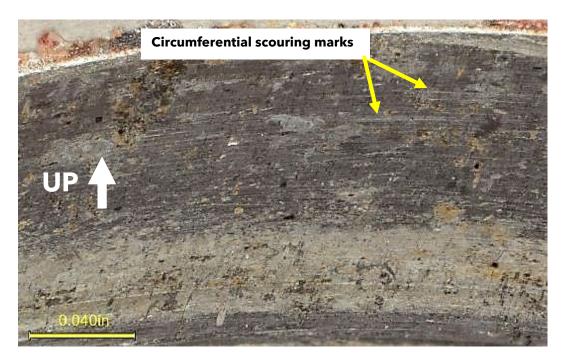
Inner surface of barrel showing circumferential scouring marks in the area that corresponded to the upper bearing assembly.
